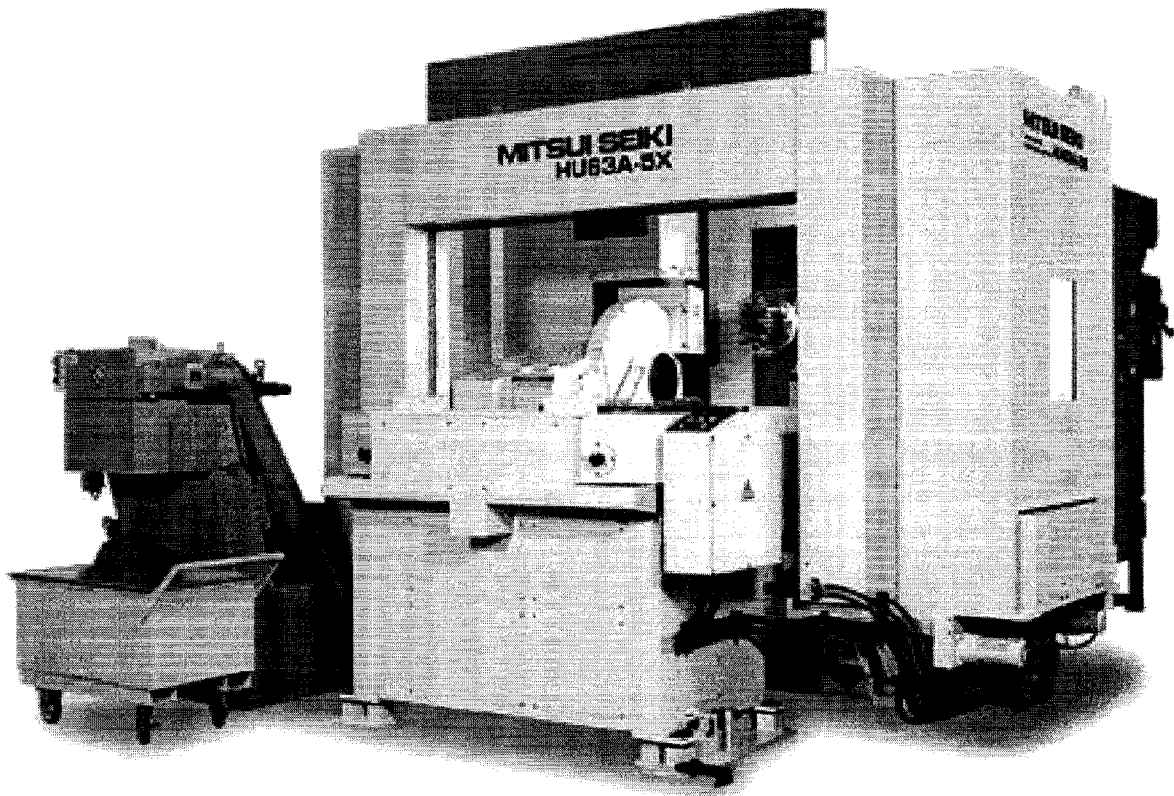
The 5-axis machine Mitsui Seiki HU63A-5x
